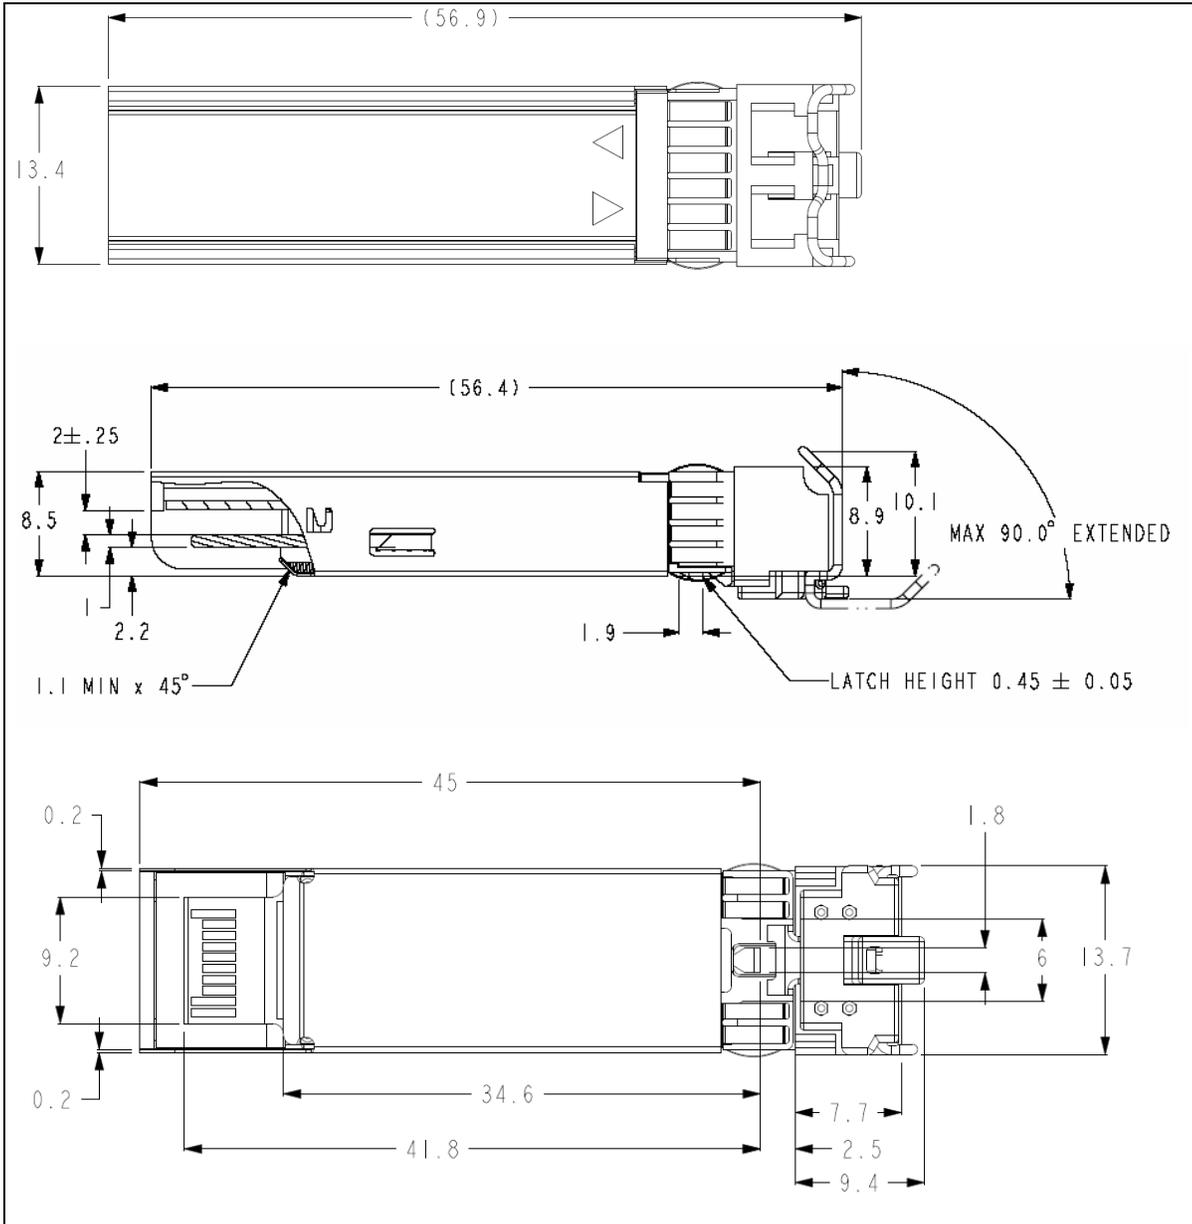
Mechanical outline drawing of DWDM SFP Transceiver.
